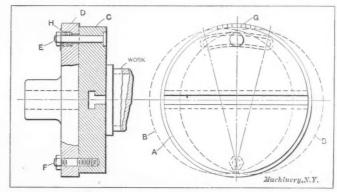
Special Lathe Face-plate for Turning Eccentric Rings, etc.
